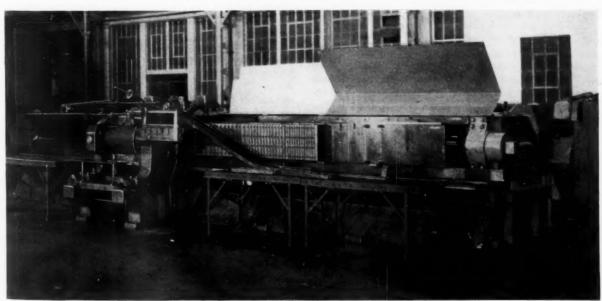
SPECIAL HORIZONTAL MACHINE FOR THE CYLINDER HEADS OF SIX-CYLINDER AUTOMOBILE ENGINES
